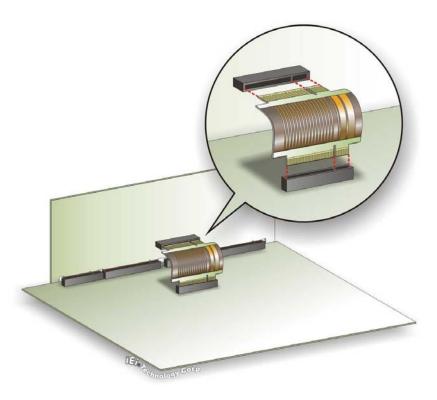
PCIe x8 Board-to-Board Connector Installation
